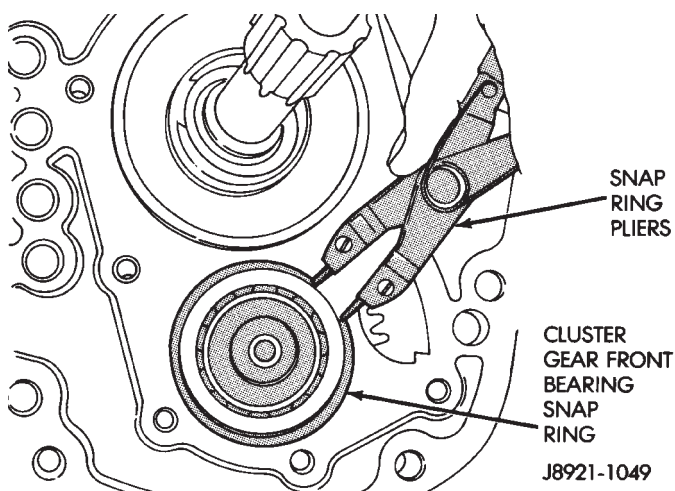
Removing Cluster Gear Front Bearing Snap Ring
